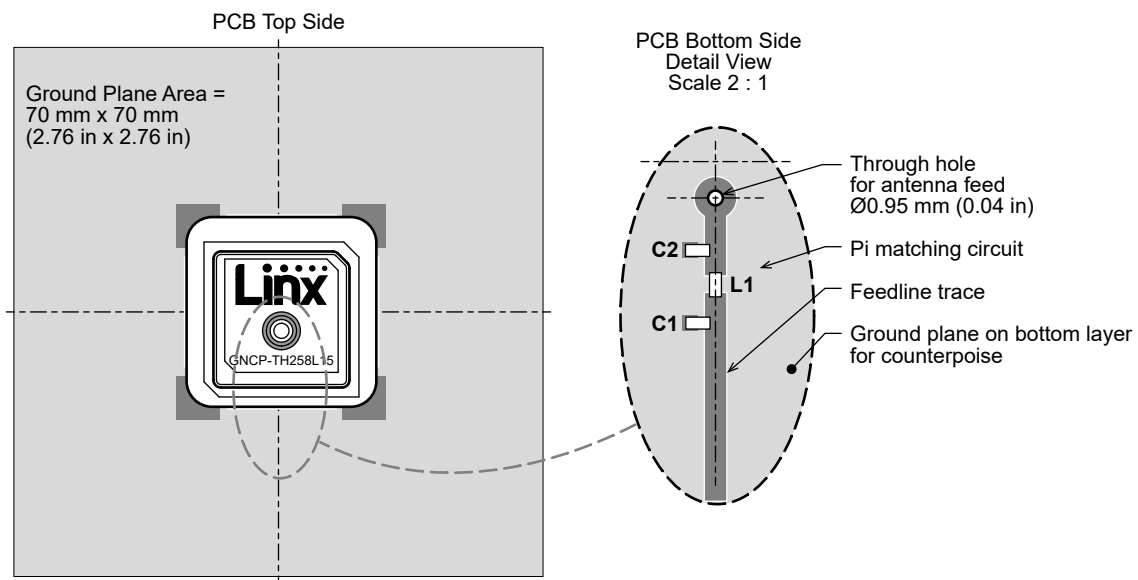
Recommended PCB Layout for the ANT-GNCP-TH258L15
